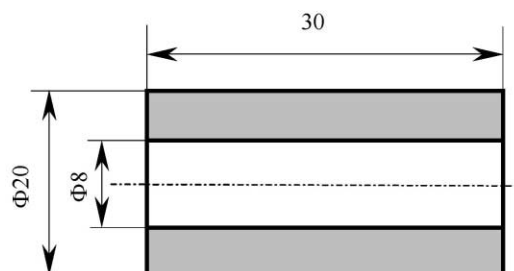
Geometry and dimensions of the ceramic nozzle.
